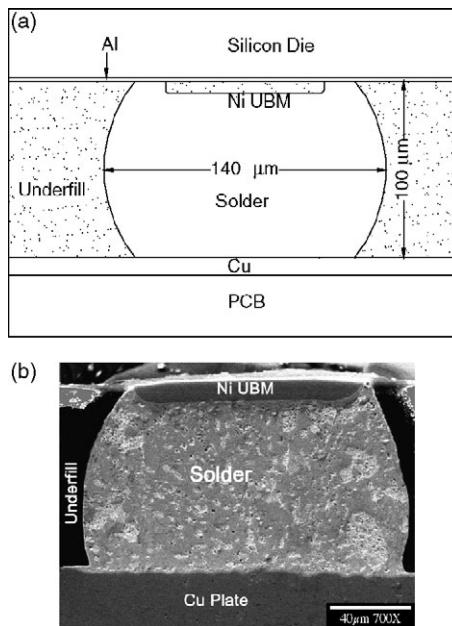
(a) A schematic cross-section; (b) SEM secondary image (right) of solder joint on Module #3.
